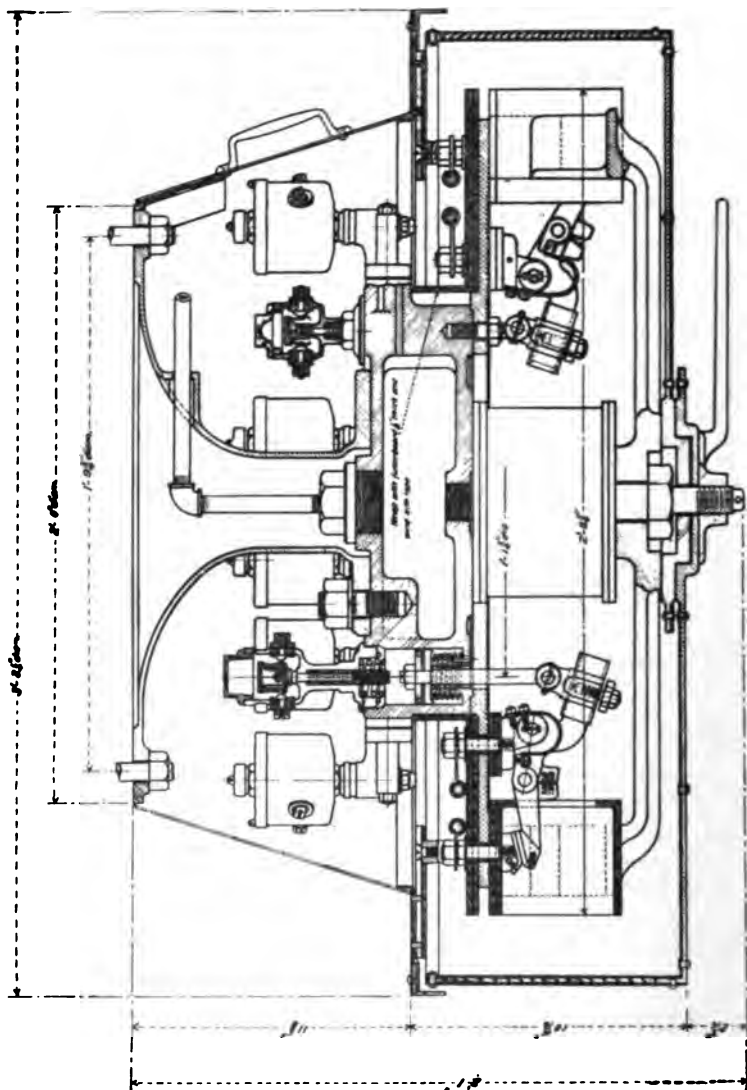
SECTION THROUGH TURRET CONTROLLER.
